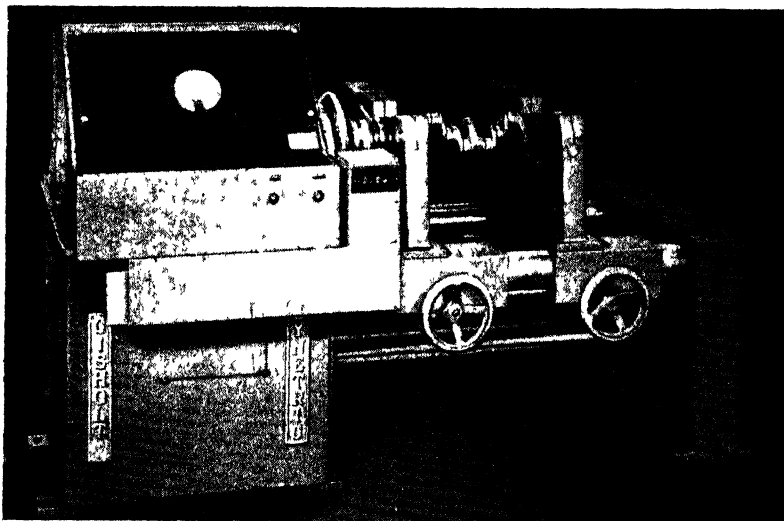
THE GISHOLT TYPE "C" DYNETIC BALANCING MACHINE, WITH AUTOMOBILE CRANKSHAFT UNDER TEST
